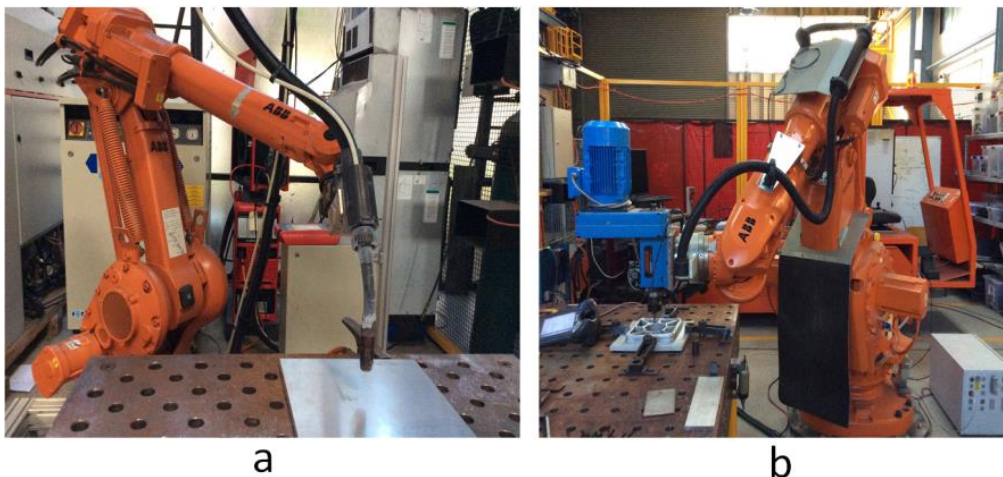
Experimental set-up: (a) ABB 1400 robot with Fronius welder for additive manufacturing, (b) ABB 6660 robot with motor spindle for machining.
